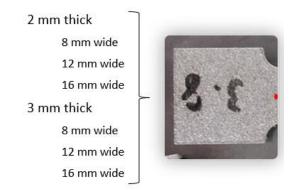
Modified 2 and 3 mm thick tensile specimens
